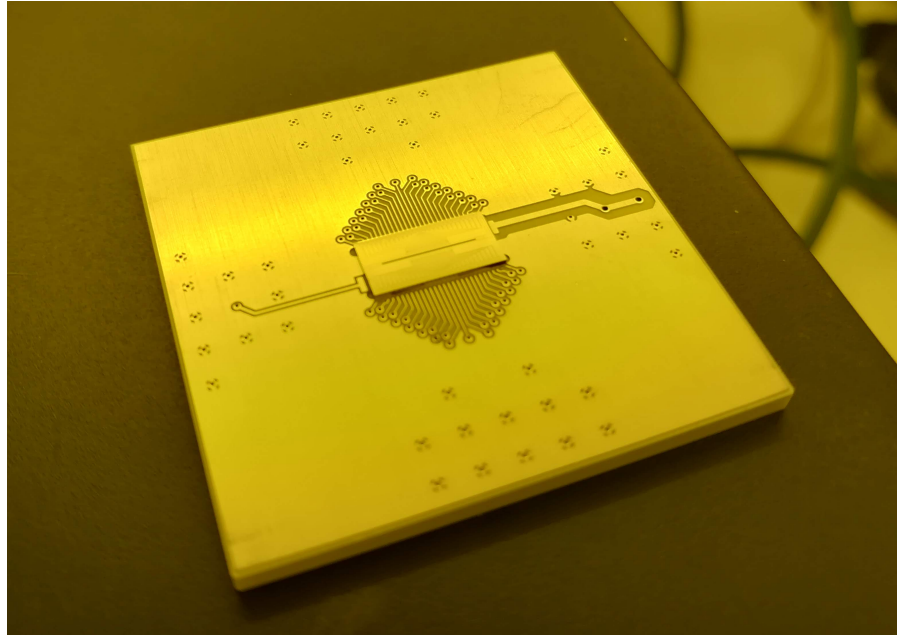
PACKAGED TRAP GLUED AND WIRE-BONDED ON INTERPOSER PCB: The separated lead for the RF is visible on the right side, with the center electrode connected from the left side. The traces for the segments are fanned out symmetrically at the top and bottom edge of the trap.
